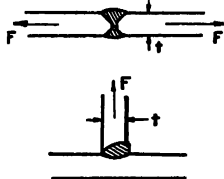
Butt-welded Joints Subjected to Tension.
